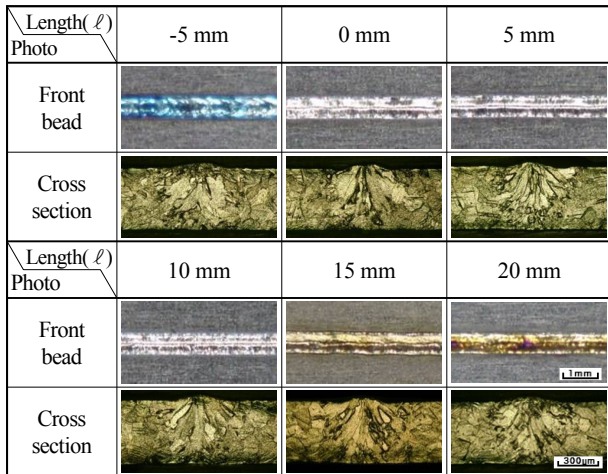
Various bead shapes with length between shielding zone and laser incident point using side shield gas nozzle($f_d=0$ mm, $P_L=500$ W, $v=10$ m/min)
